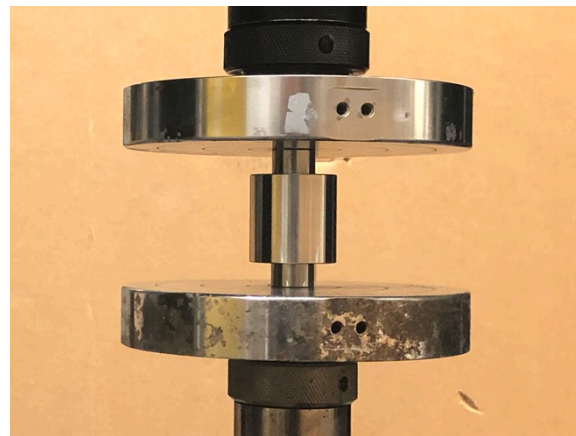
Compaction self-assembly (CSA), carried out by the Instron universal testing machine
